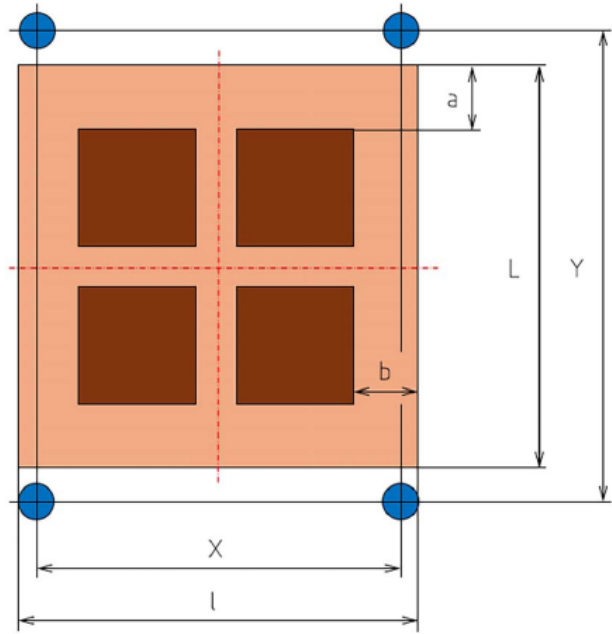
Essential geometry definition and position of sensors to reproduce a plane
